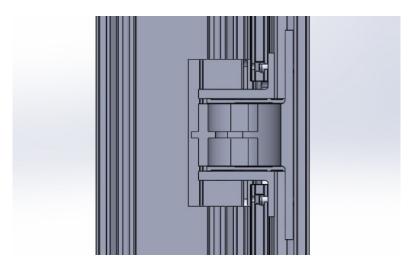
Cross-sectional view of the hinge mounted to the three stiles, with the cutout in the three parts visible.
